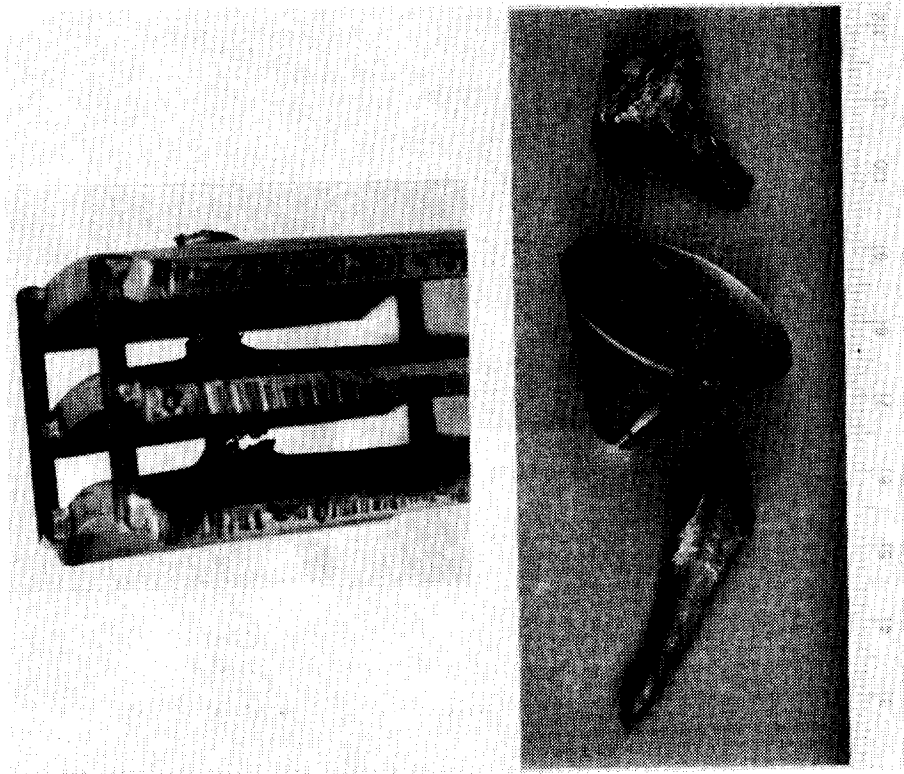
Top: Carrot plugging the hole in the center string of a three-string target. Bottom: Examples of carrots produced by a wrapped metal liner charge
